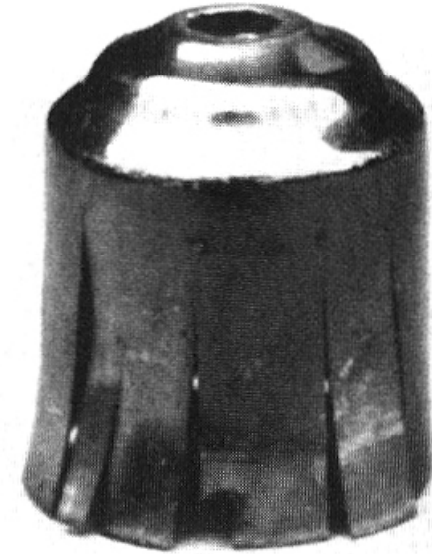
Stress-corrosion cracking in a deep-drawn brass part for a light fixture. The cracks developed over a period of time. Brass and austenitic (300 series) stainless steels are among metals that are susceptible to stress-corrosion cracking.
